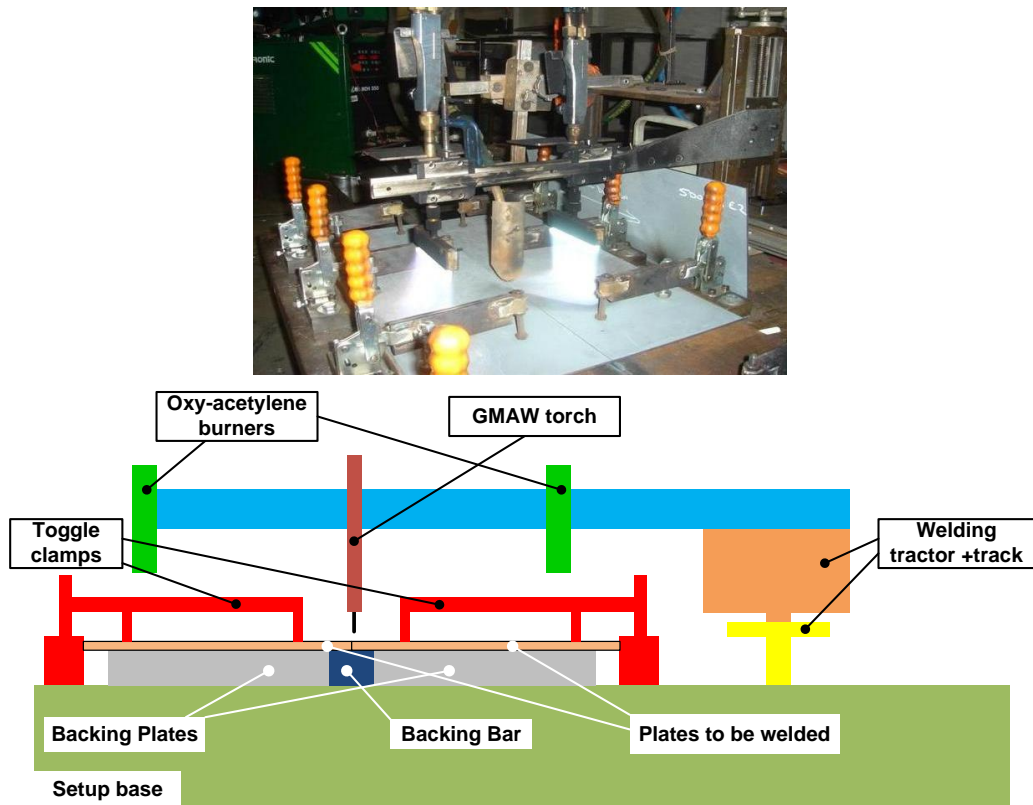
TTH oxy-acetylene burners experimental setup for butt welds a) Photo of oxy-acetylene burners in operation and b) schematic cross-section of the setup
